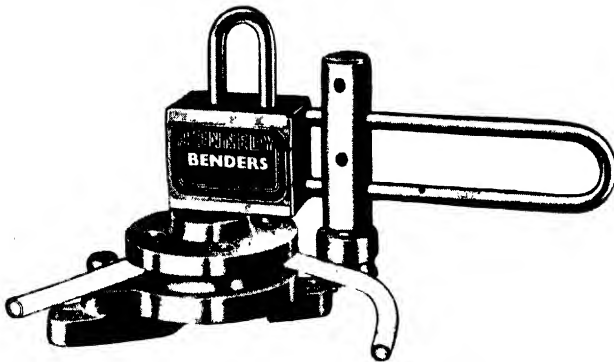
SMALL UNIVERSAL BENDING MACHINE
